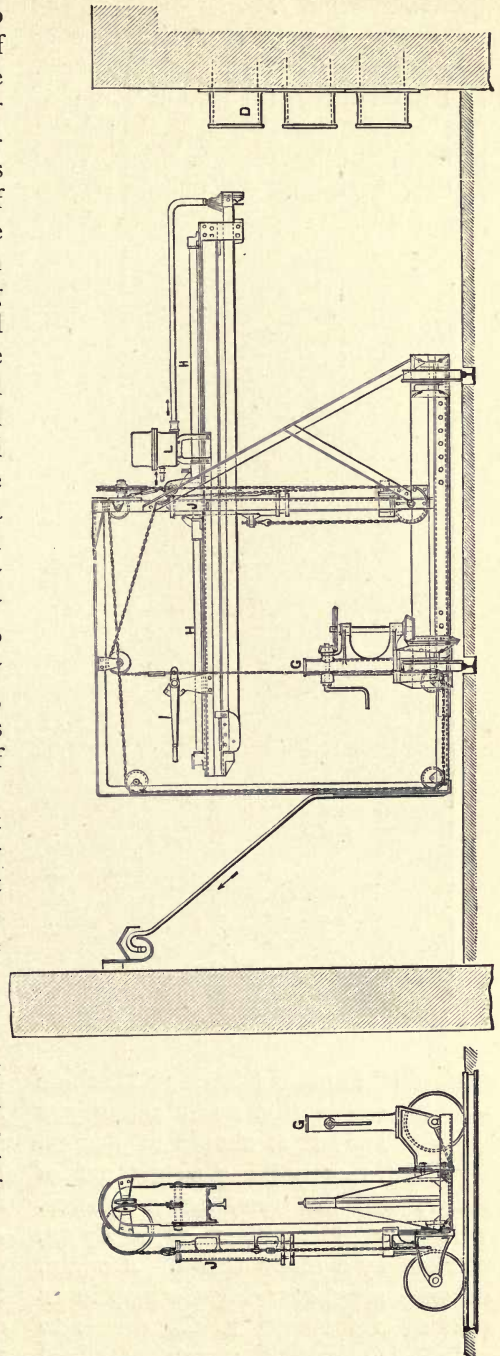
OUTLINE OF ARROL-FOULIS HYDRAULIC DRAWING MACHINE.
